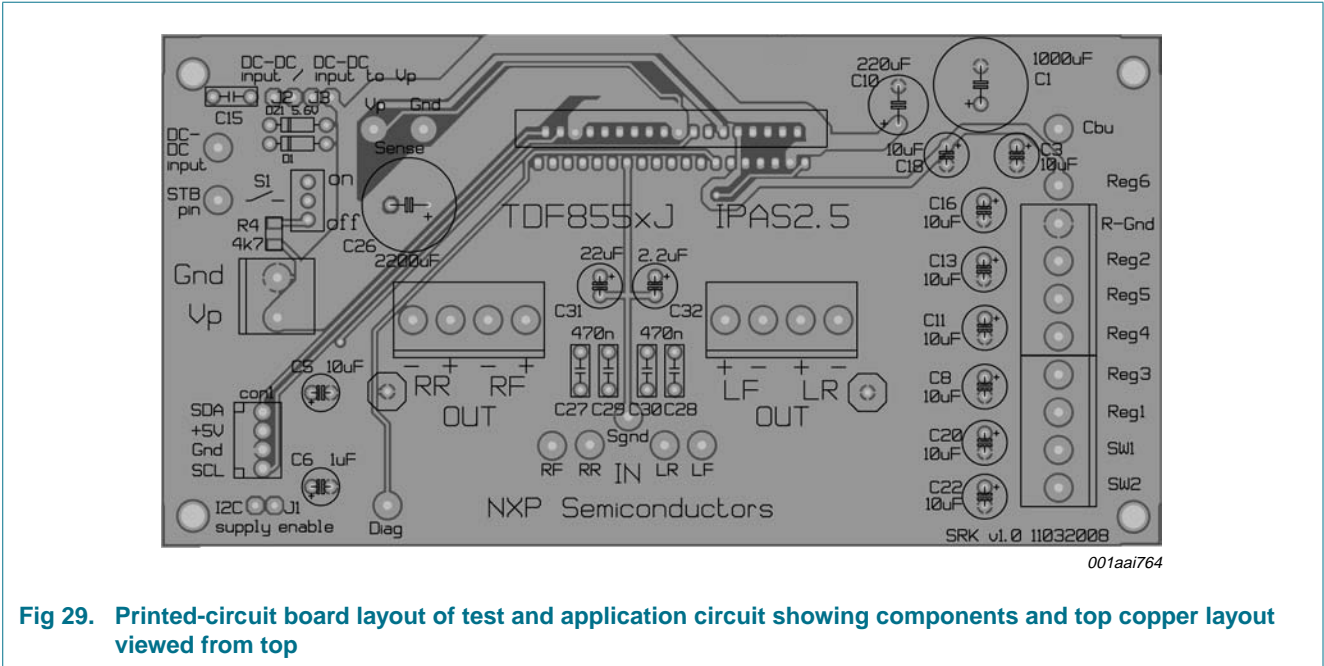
Printed-circuit board layout of test and application circuit showing components and top copper layout viewed from top
